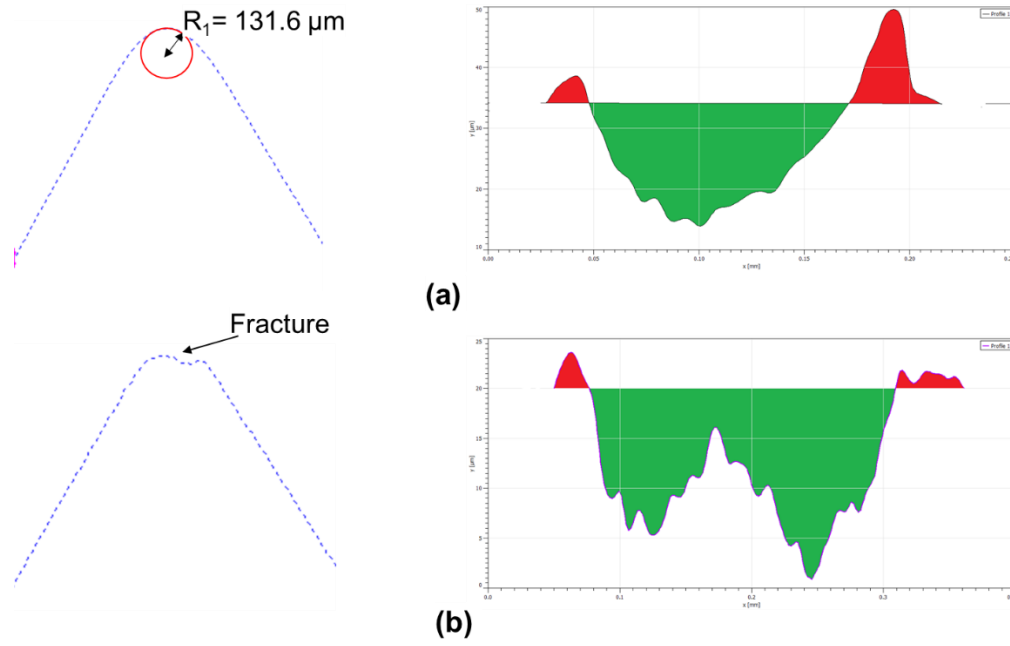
Tool tip profile and corresponding scratch profile (a) for edge rounding type wear, (b) edge fracture wear
